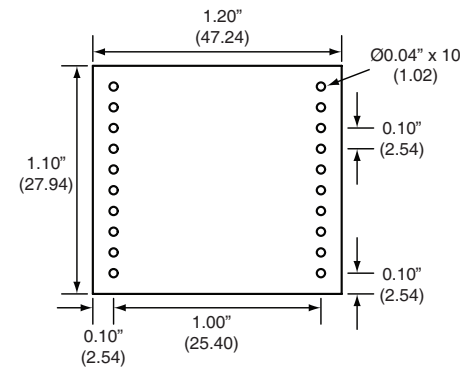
EVM-GPS-RM PCB Layout Dimensions
